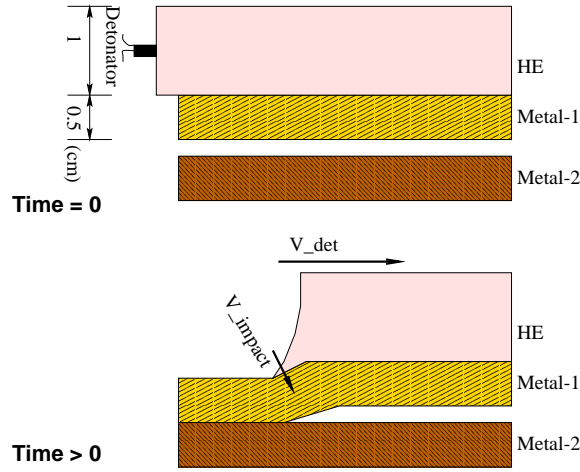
Schematic of explosive welding of two metal plates.
